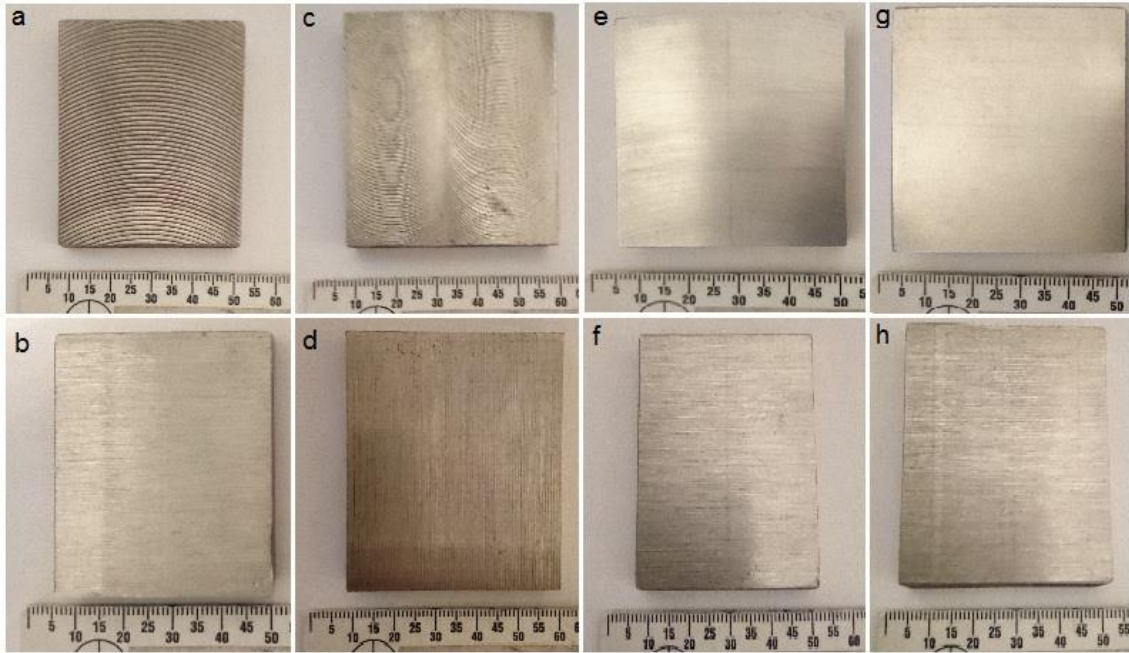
P91:A-AR samples machined with different surface finishes. (a) face milled large tool, (c) face milled small tool, (e) mechanically ground with 400 grit SiC paper and (g) mechanically ground using Al₂O₃ surface grinder, are four samples with different surface finishes, Beneath each of these samples [surfaces (b), (d), (f) and (h)] are the opposite surfaces of the samples pictured above them, e.g. surfaces (a) and (b) are opposite faces of the same sample. Sample surface (b), (d), (f) and (h) are prepared with the same horizontal bandsaw cutting process
